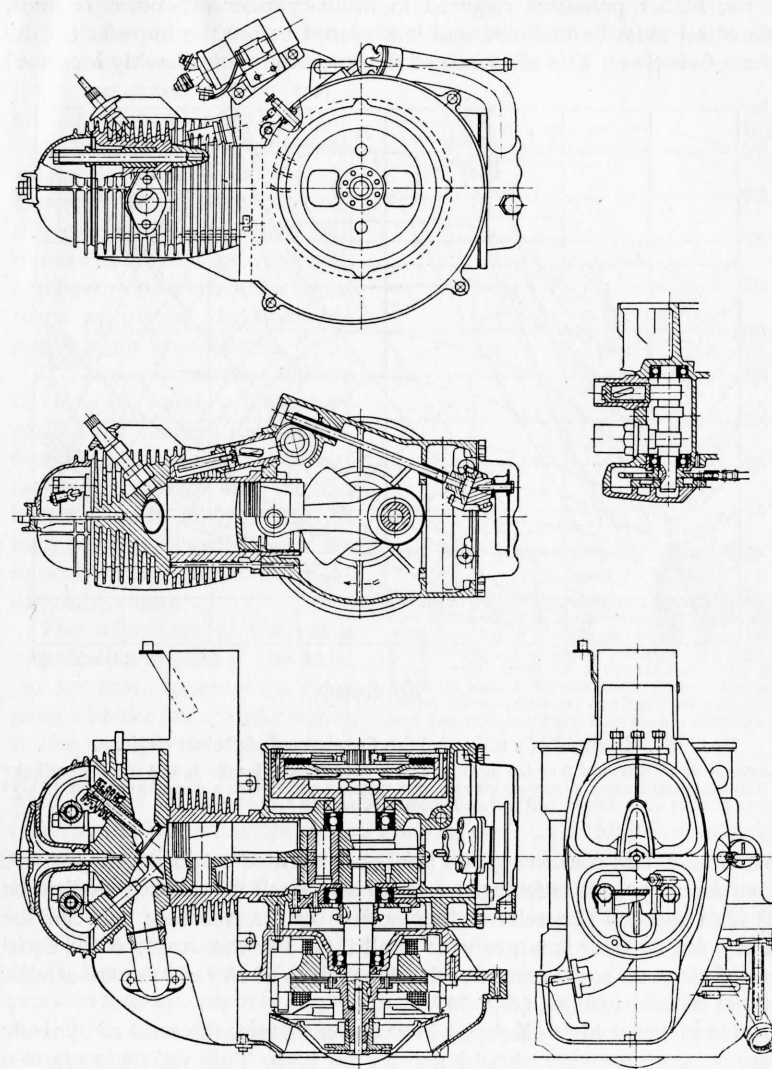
Sections of an air-cooled BMW engine, bore 72 mm, stroke 73 mm, performance 13 b.h.p. at 5,800 rev/min.
